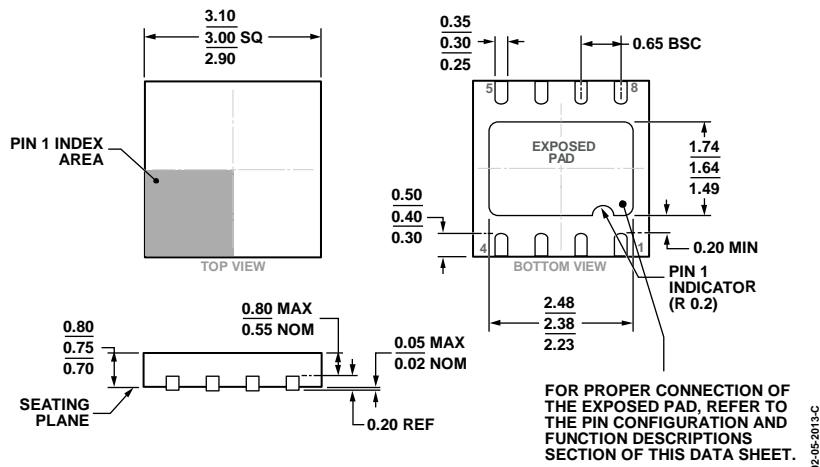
8-Terminal Quad Flat No Lead Package (QFN) [LFCSP_WD]
